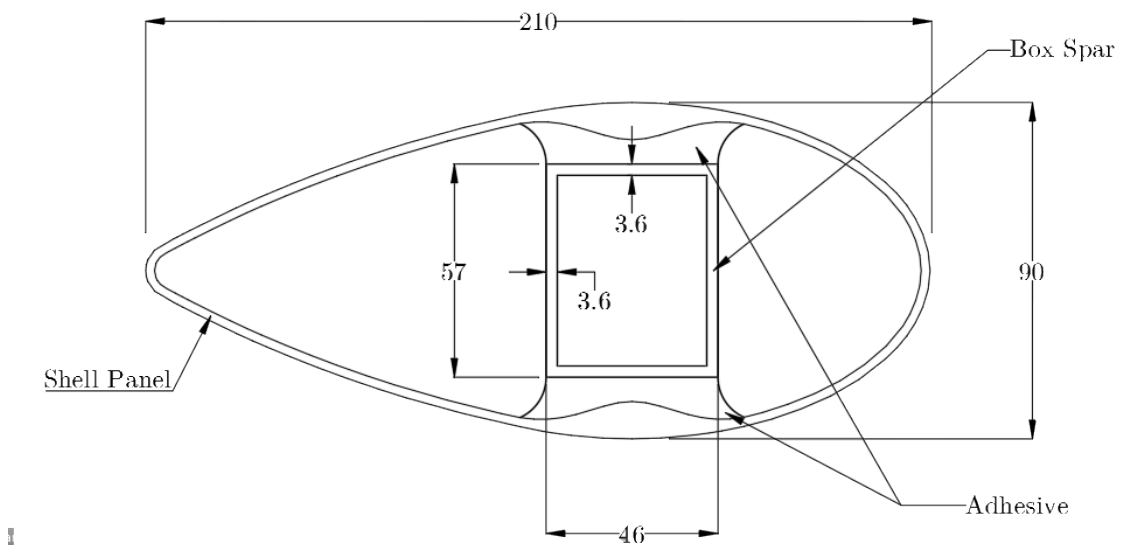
Sketch showing the blade cross-section of the prototype with dimensions in mm.
